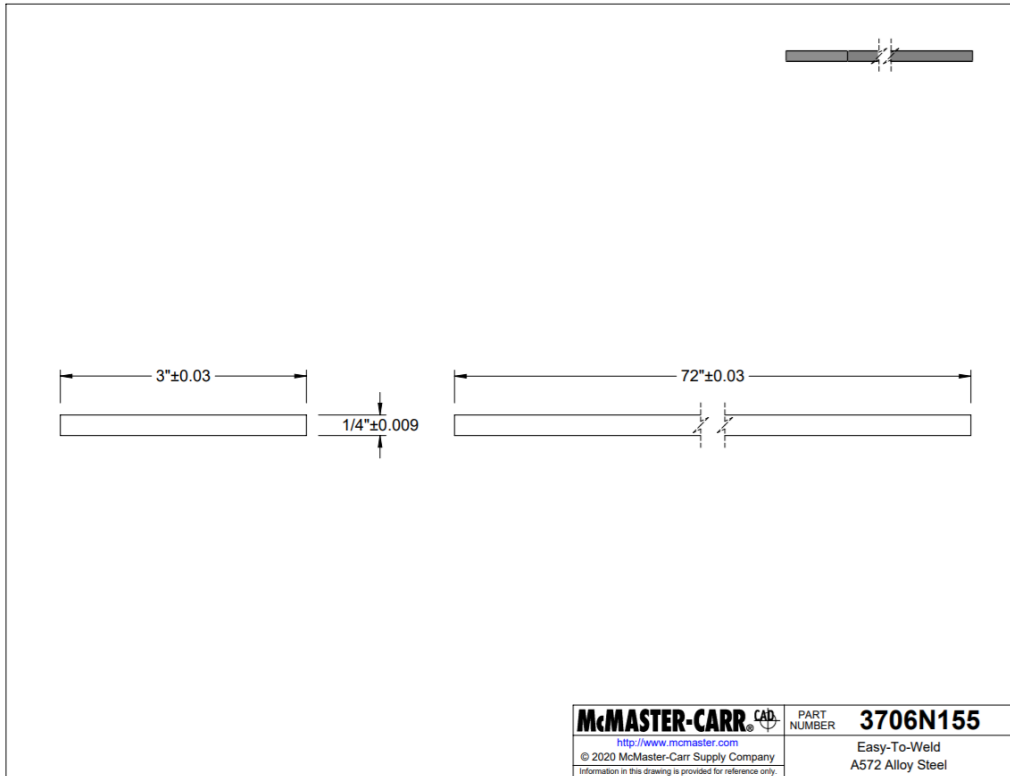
Drawing of Second Wheel Plate Used on Base and Mid Section Provided by McMaster-Carr
